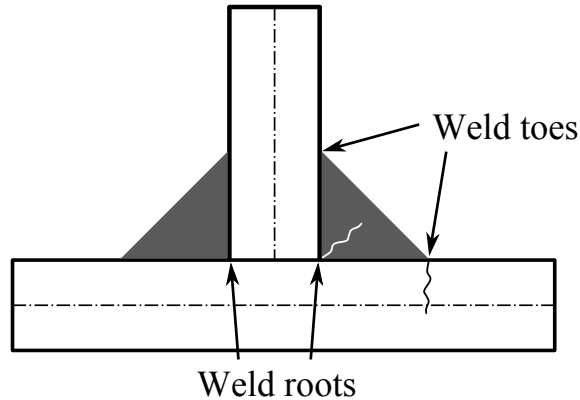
Illustration of crack initiation areas on welded details.
